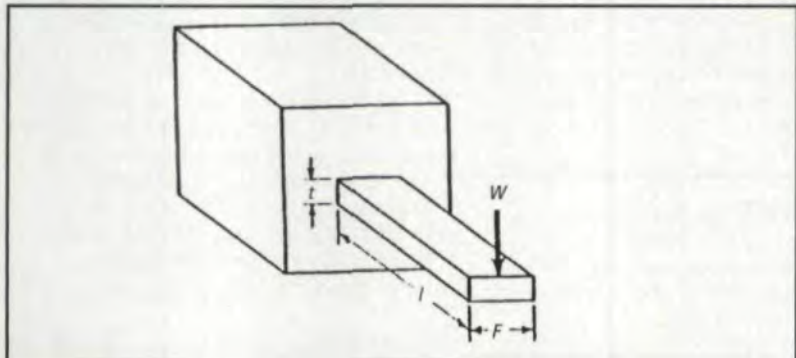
Gear tooth as simple cantilever. Courtesy of Technomic Publishing (Ref. 1).
